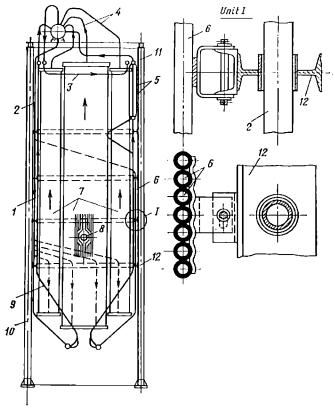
Arrangement of water walls in the furnace of a high-pressure boiler 1—front water wall; 2—downtake tubes; 5—roof water wall; 4—steam-circulating tubes; 5—slaj screen; 5—rear waterjwall; 7—side water wall; 8—tube arrangement around hurner ports; 9—dry hottom*hopper; 10—holler structure; 11—slag screen header; 12—reinforcement belt
